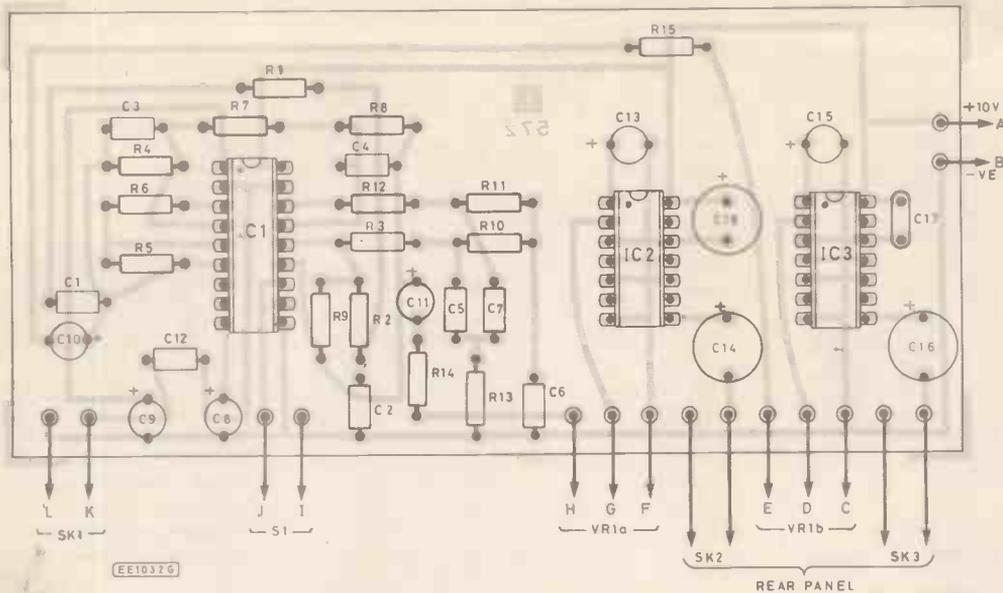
Component layout and full size printed circuit foil master pattern for the main board.
